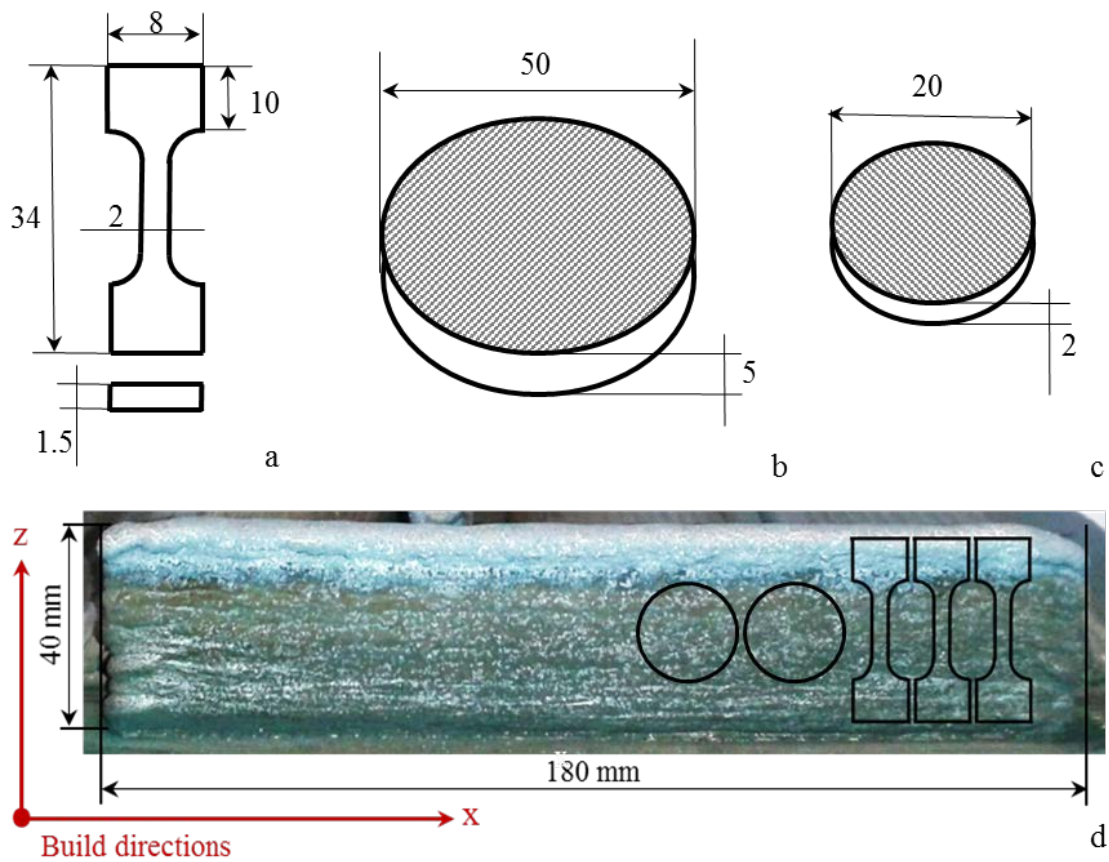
Geometry of samples for mechanical testing: (a) tensile test sample; (b) wear test sample; (c) corrosion test sample; (d) schematic diagram showing the direction of vertical wall deposition and samples extraction locations.
